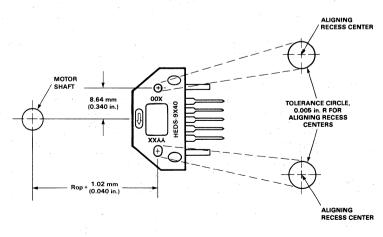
HEDS-9X40 Mounting Tolerance.
